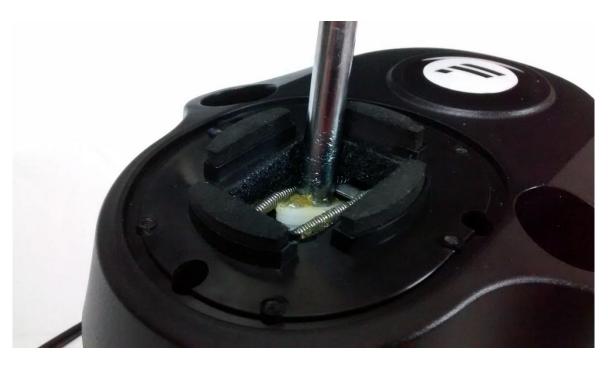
Small tolerances between bridge plates, springs and shifter body
